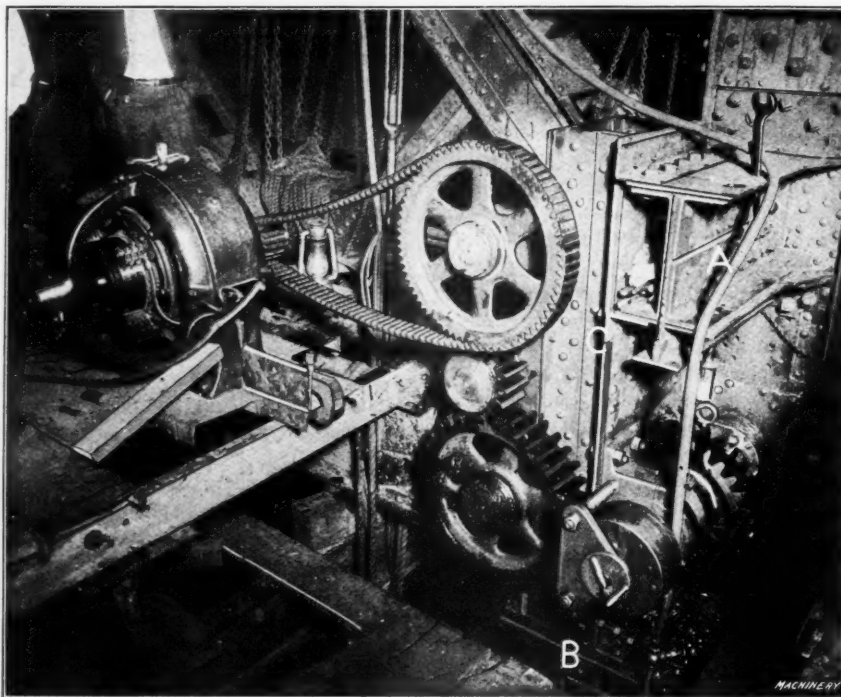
Special Boring Machine in Place on Williamsburg Suspension Bridge ready for re boring Pin Hole from 10 to 13 Inches Diameter in One Passage of Cutter-head
